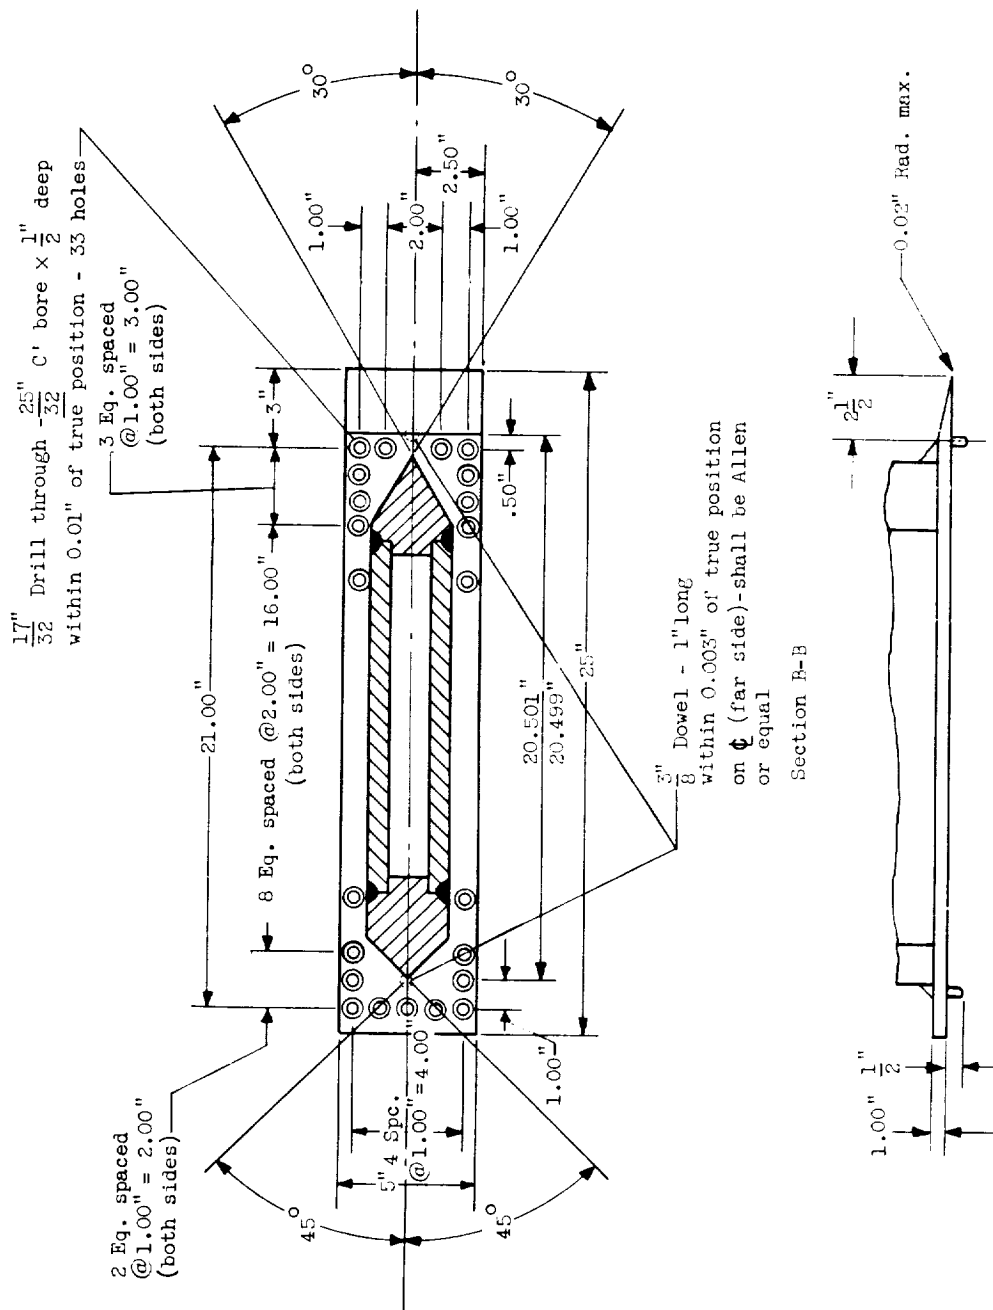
Auxiliary strut joint, Lewis Unitary Plan Wind Tunnel.
